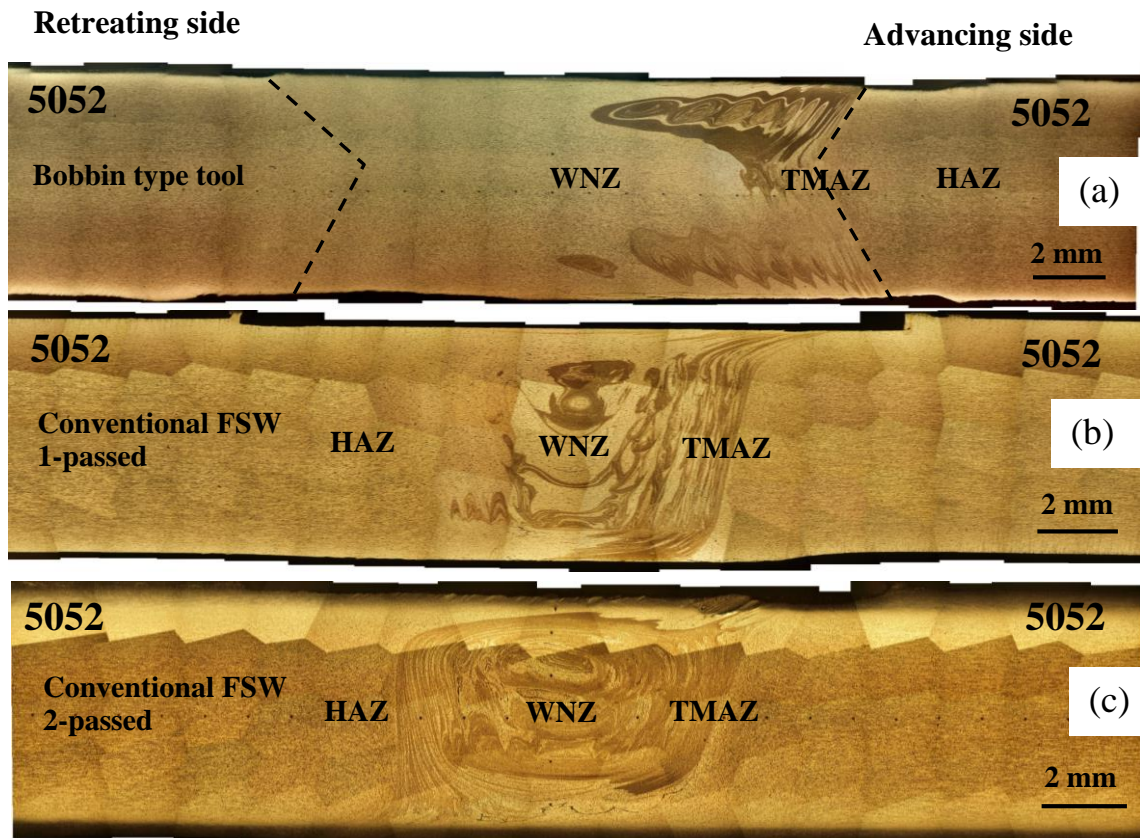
Welded structure in transverse cross-section of FSWed 5052 joints joined by (a) bobbin type tool, (b) conventional FSW tool: single-passed and (c) conventional FSW tool: double-passed.
